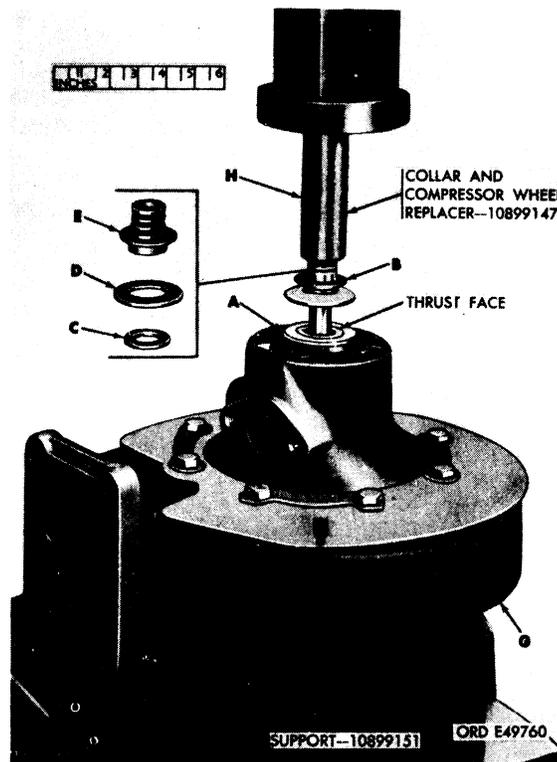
PRESSING THRUST COLLAR ASSEMBLY OR FLINGER SLEEVE ON SHAFT AND TURBINE WHEEL - TURBOCHARGERS 7748900 AND 10935279.
